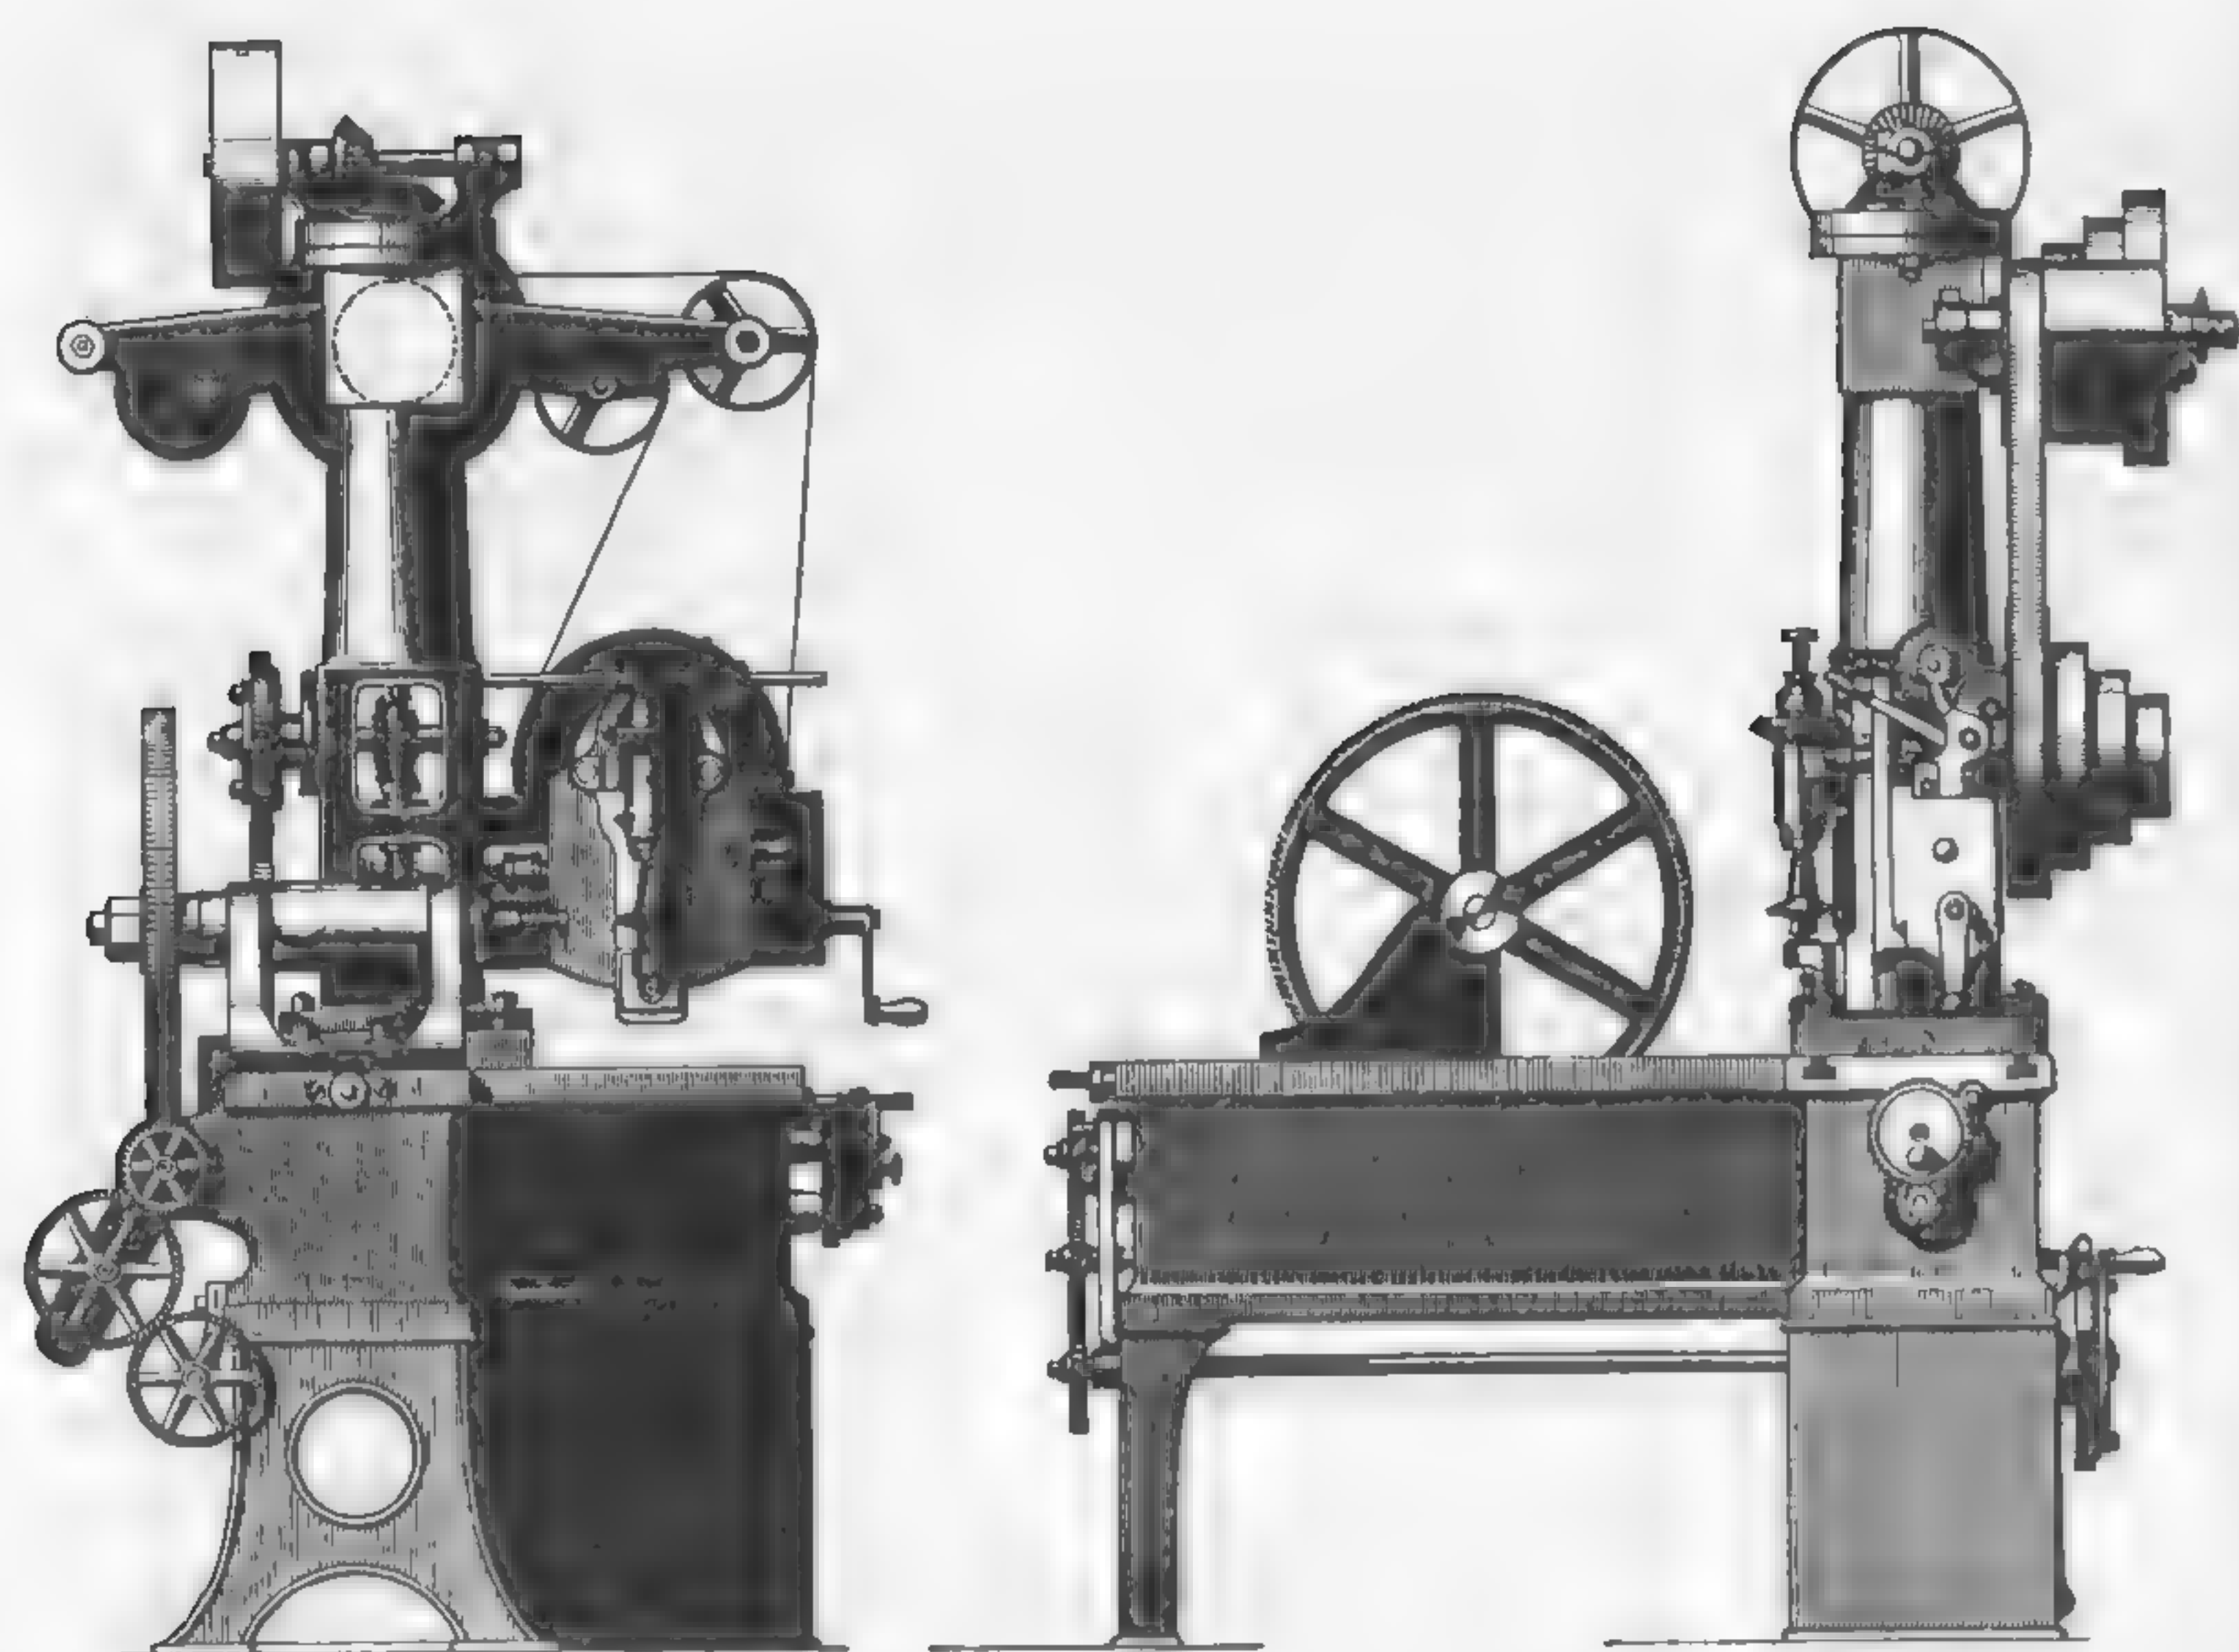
SELLERS' AUTOMATIC GEAR CUTTER, 1867 (*Engineering*)
